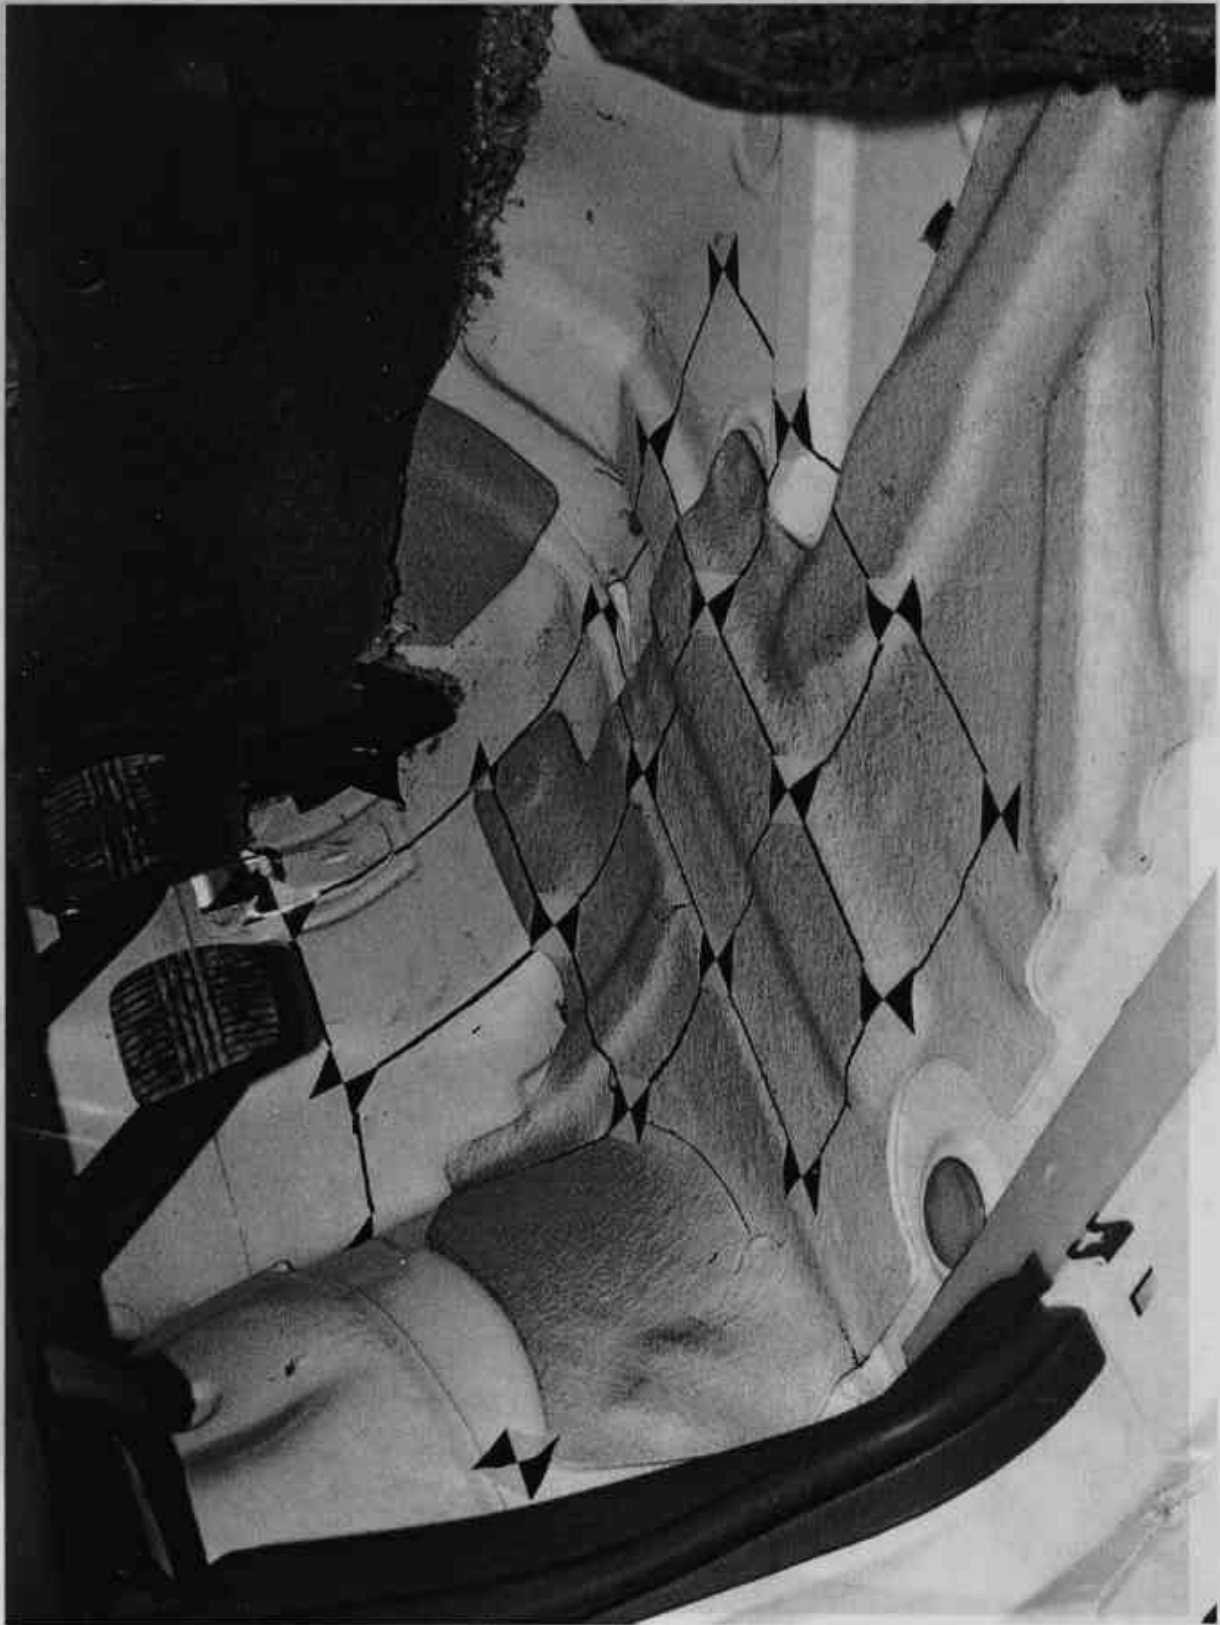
PRE TEST DRIVER SIDE FLOOR PAN
